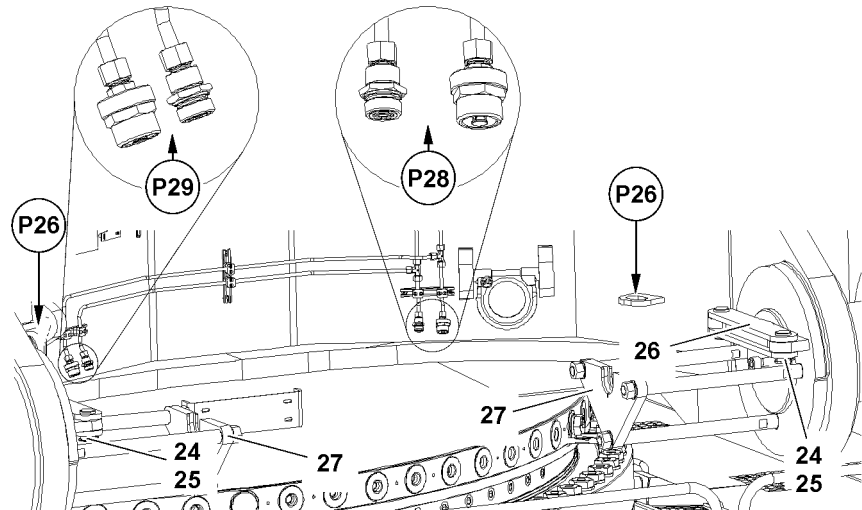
B113069: Turntable frame front section from the rear - pinning on the bottom
